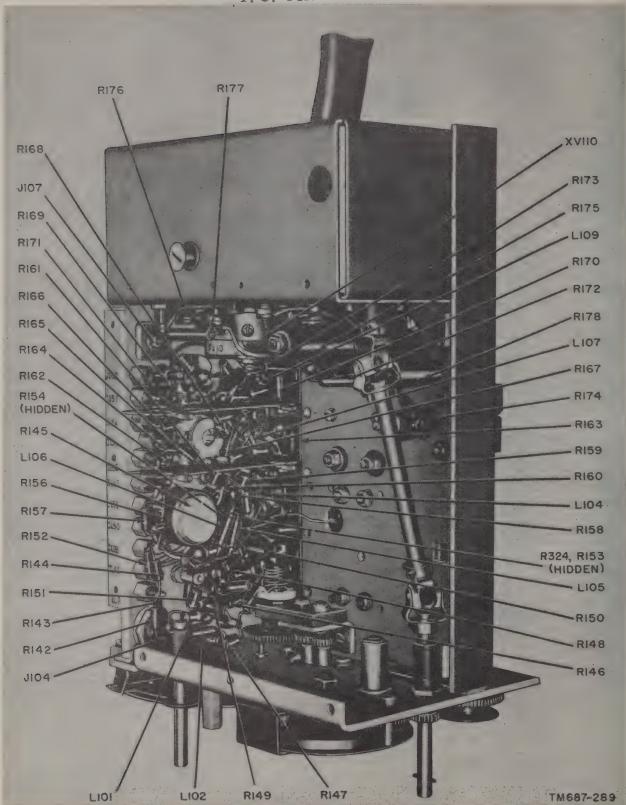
Rf exciter plug-in assembly, right-oblique view showing resistors.
